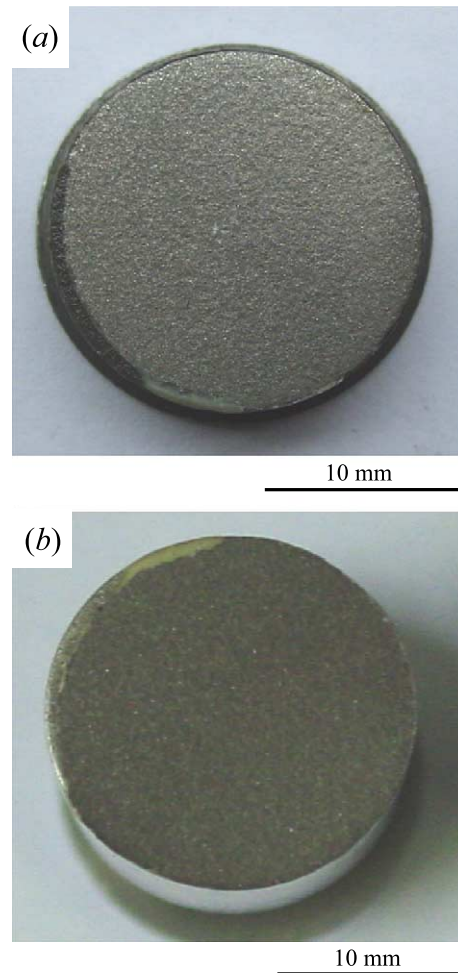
The fracture surfaces of the TBCs samples after tensile testing: (a) morphology of the BC surface and (b) matching ceramic surface of TBCs.
